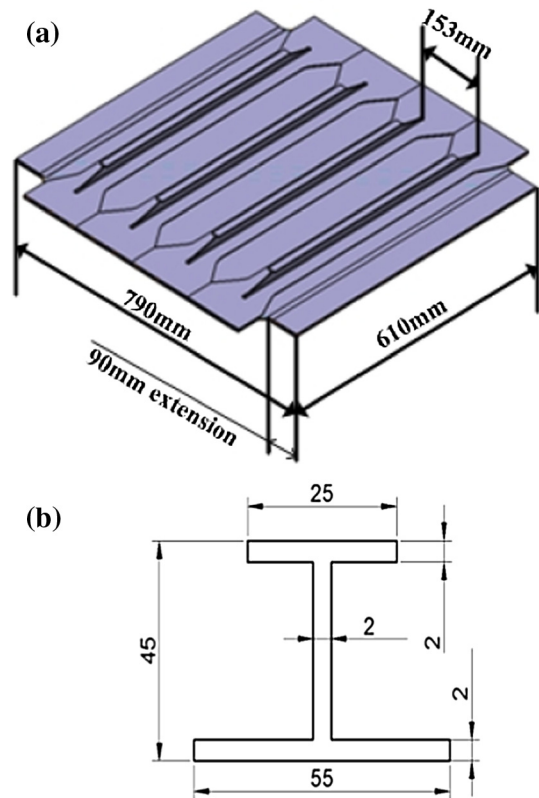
Specimen and dimensions: (a) specimen; (b) detailed dimensions of stiffener.
